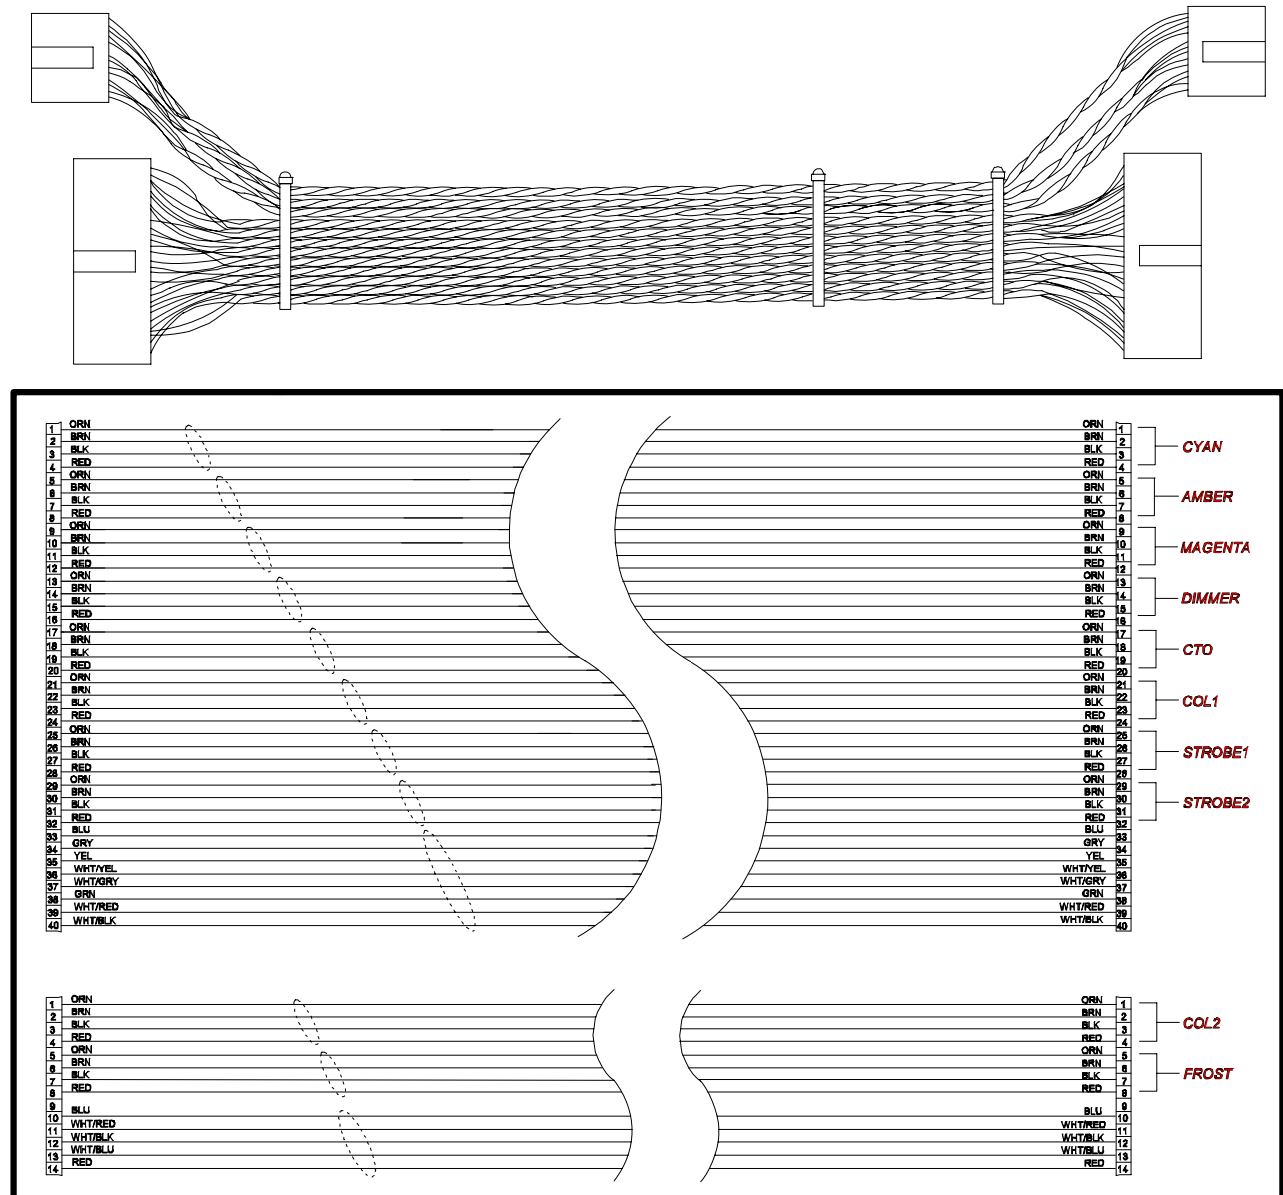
Color (MCB to Interconnect) Cable Assembly
